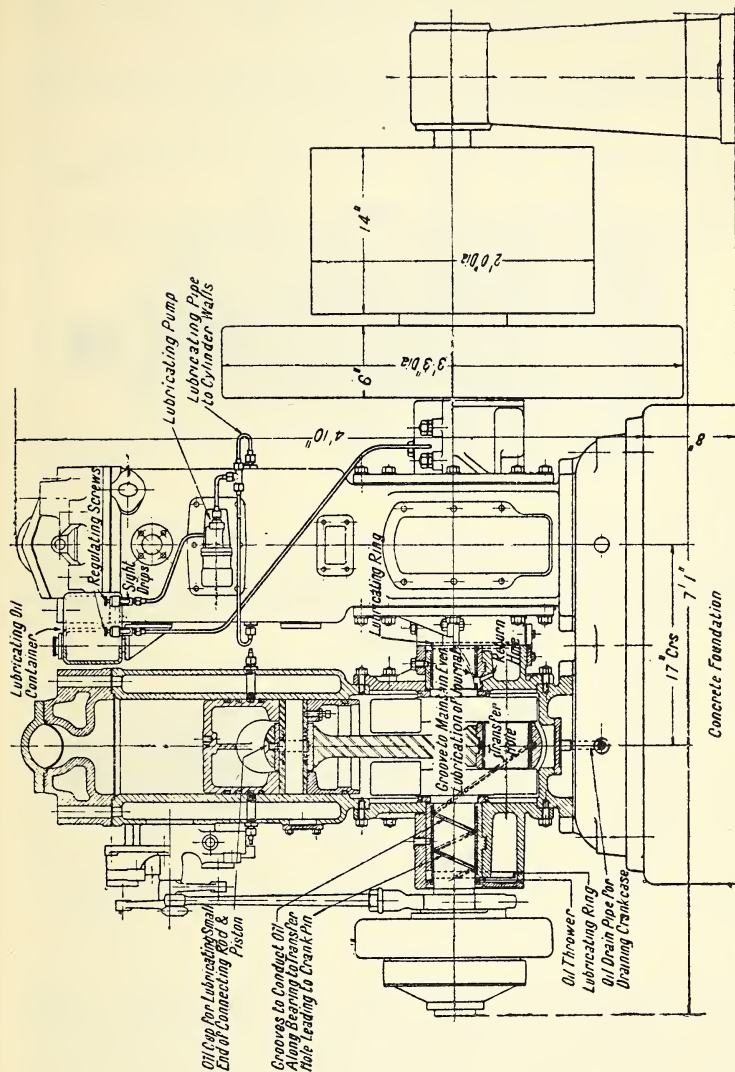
ARRANGEMENT OF PETTER SOLID-INJECTION OIL ENGINE
